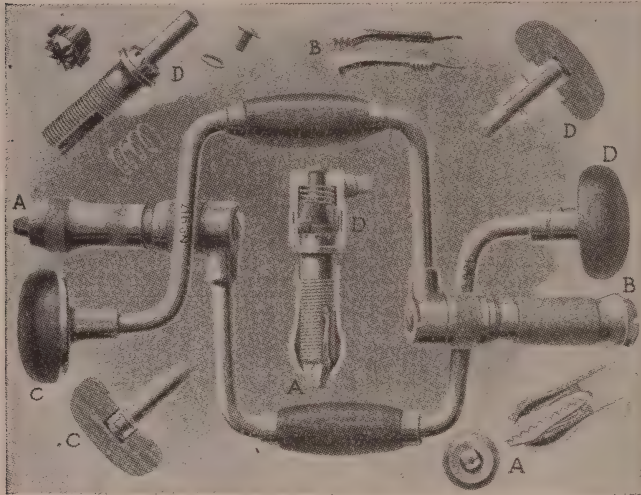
Further Examples of Ratchet Braces and Fittings
